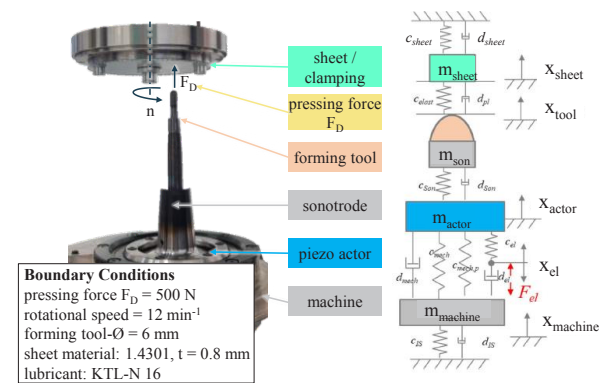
Pin-on-disk setup with vibration assisted forming tool (left). Model of the ISF vibration unit with process position, workpiece and machine to adapt process parameters (right).
